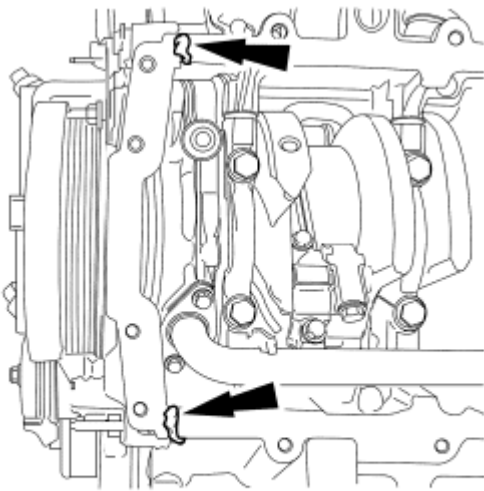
Applying Silicone Gasket And Sealant At Engine Front Cover-To-Cylinder Block Sealing Surface
